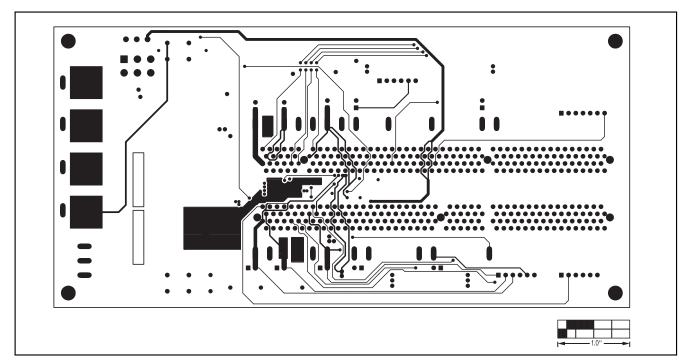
MAX5915 EV Kit PC Board Layout—Solder Side
